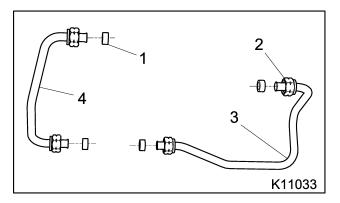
Low-pressure fuel pump inlet and outlet tube assemblies
